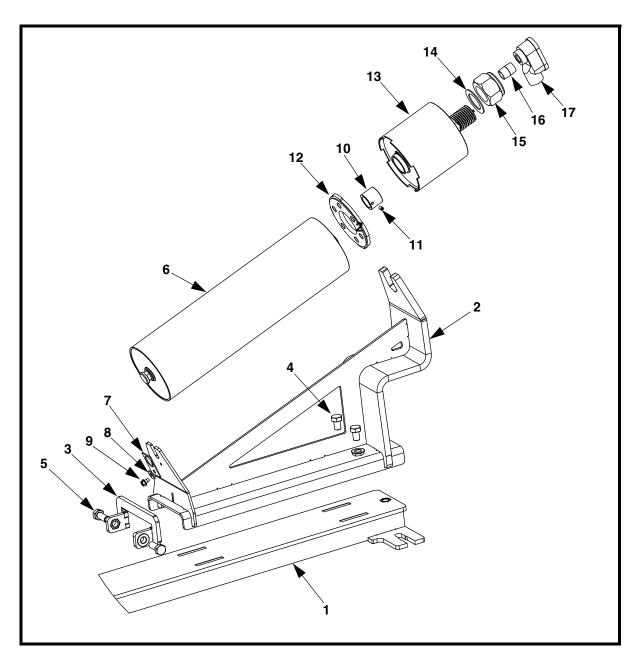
Martin® Roll Generator Assembly, P/N RGTMIDXP-XXXX1XX
